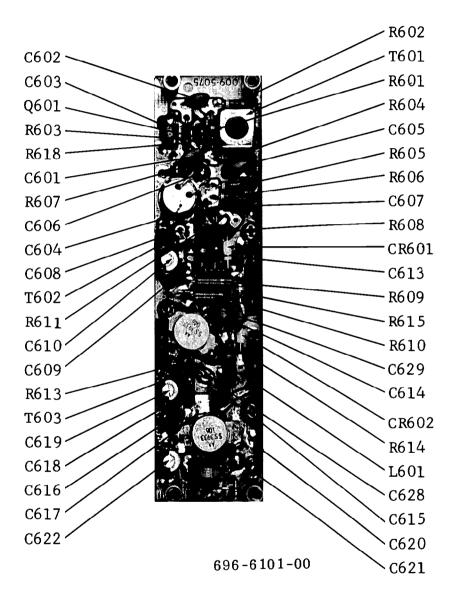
TRANSMITTER ASSEMBLY (Dwg. No. 696-6101-00)
